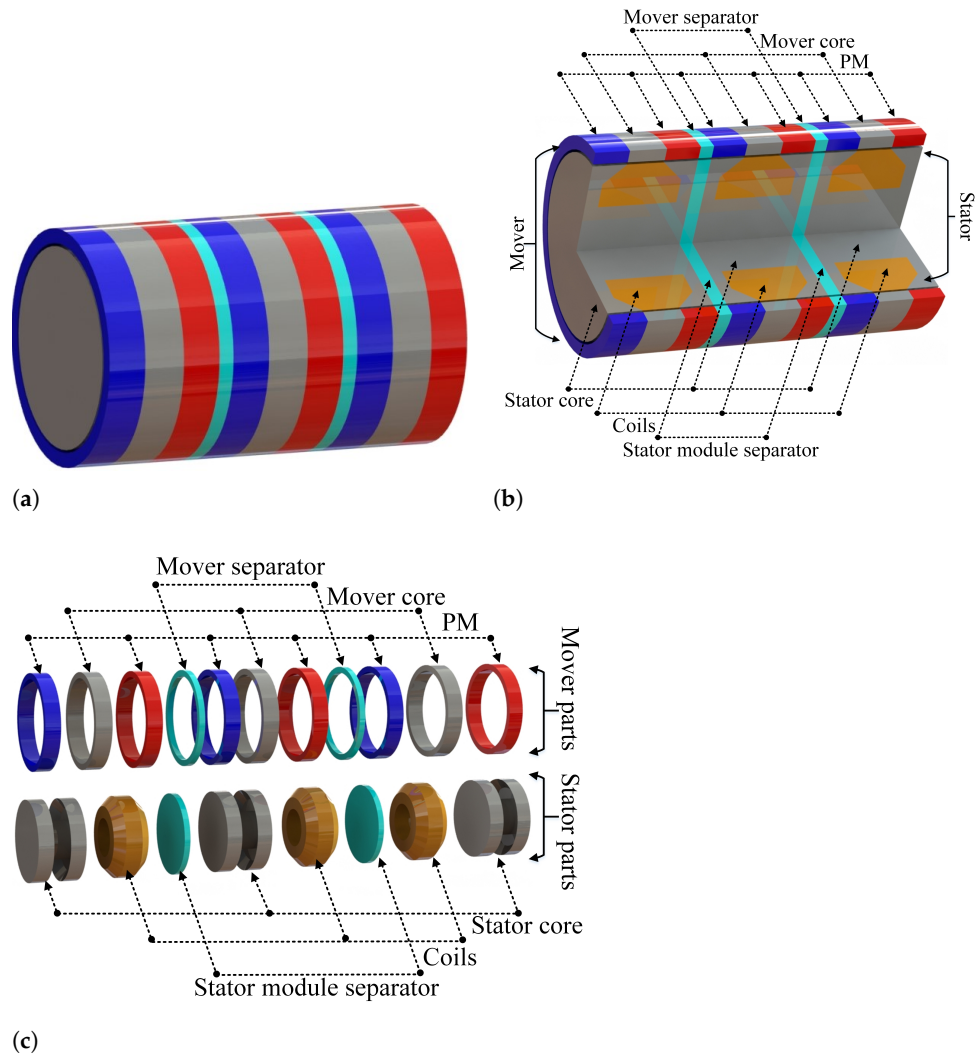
Three-dimensional model of TMM-LOA: (a) full assembly; (b) cross-sectional view; and (c) exploded view.
